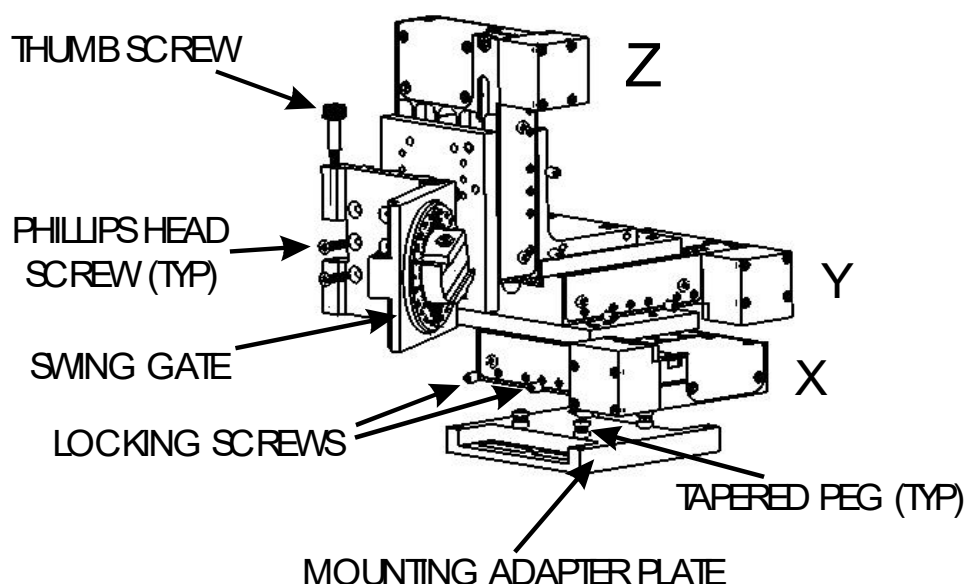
Angled side view of MP-225/M showing swing gate and mounting adapter plate.
